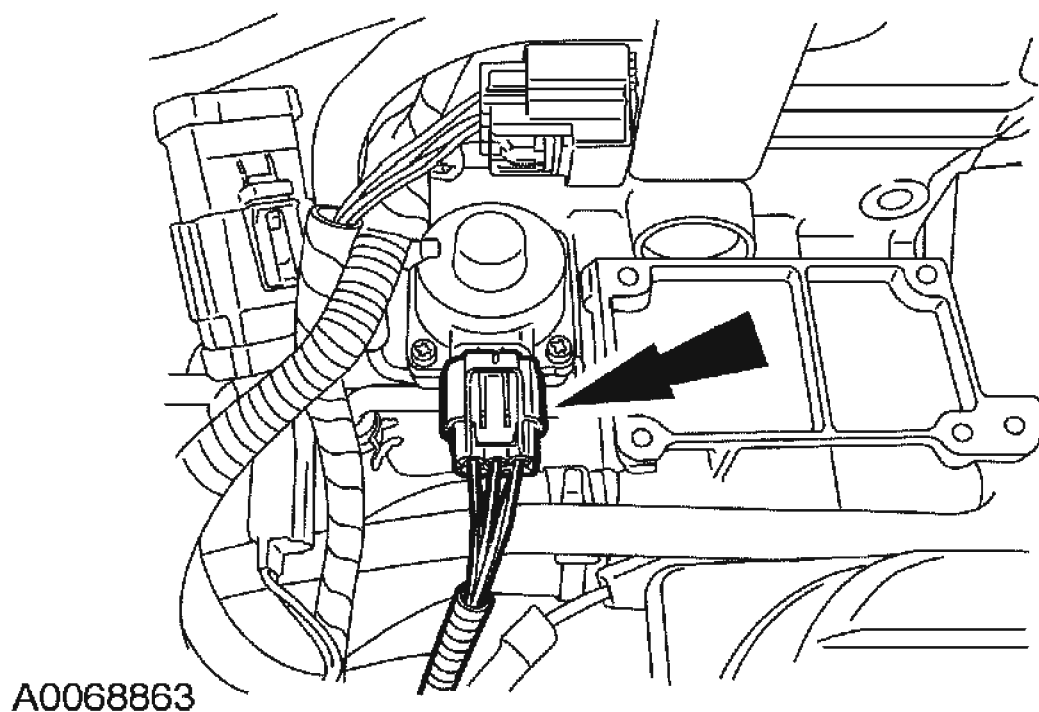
Disconnecting Exhaust Gas Recirculation Valve Electrical Connector
